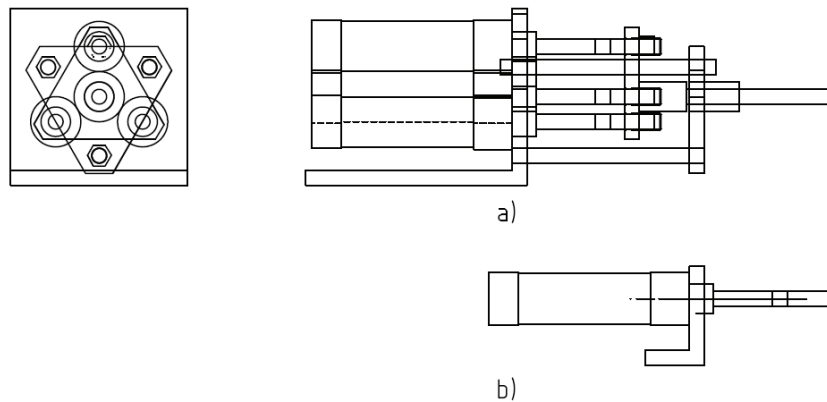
Proposed system a) Front and side view, b) single cylinder with a compatible interface.
